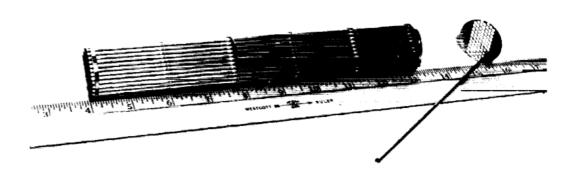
HEAT EXCHANGER MODULE TUBE BUNDLE
